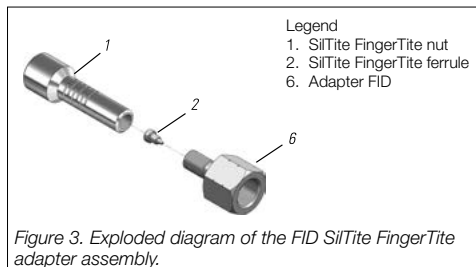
Exploded diagram of the FID SiTite FingerTite adapter assembly.
